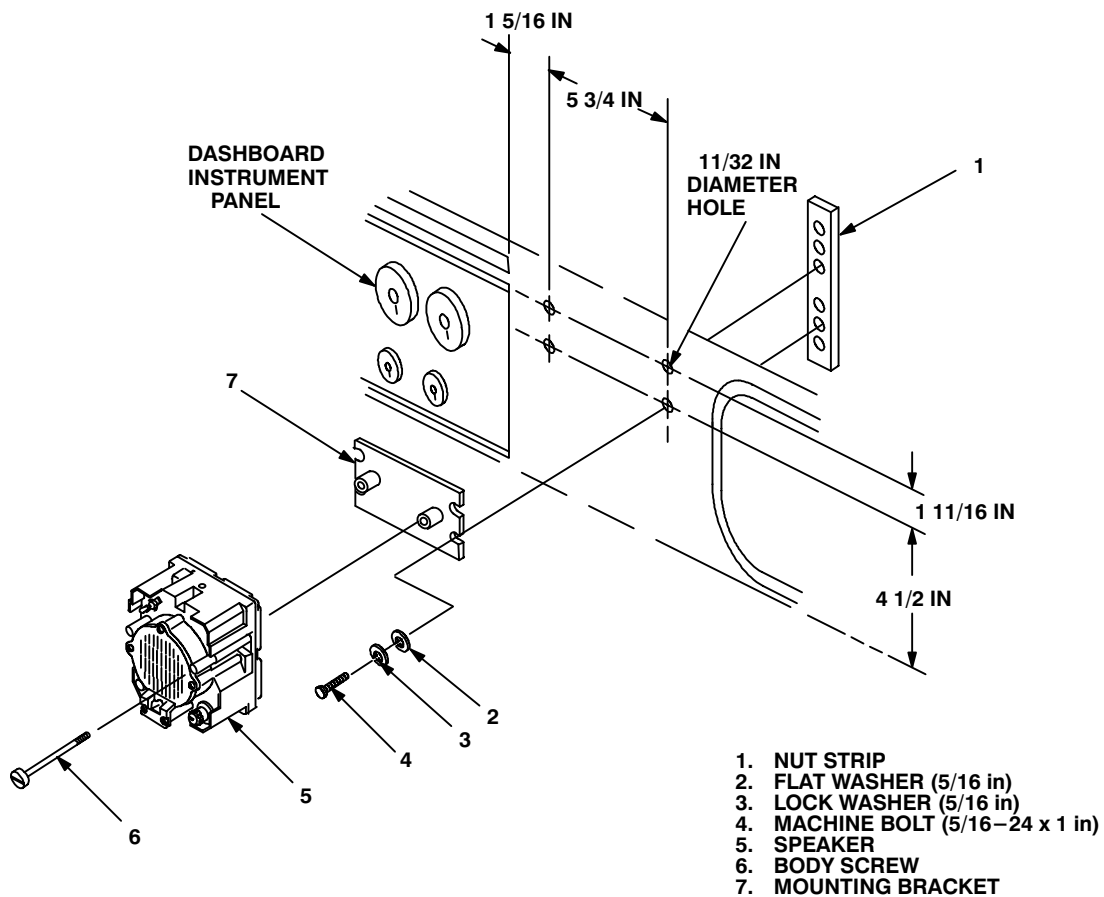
(1). Speaker Installation: Dashboard Mounting
